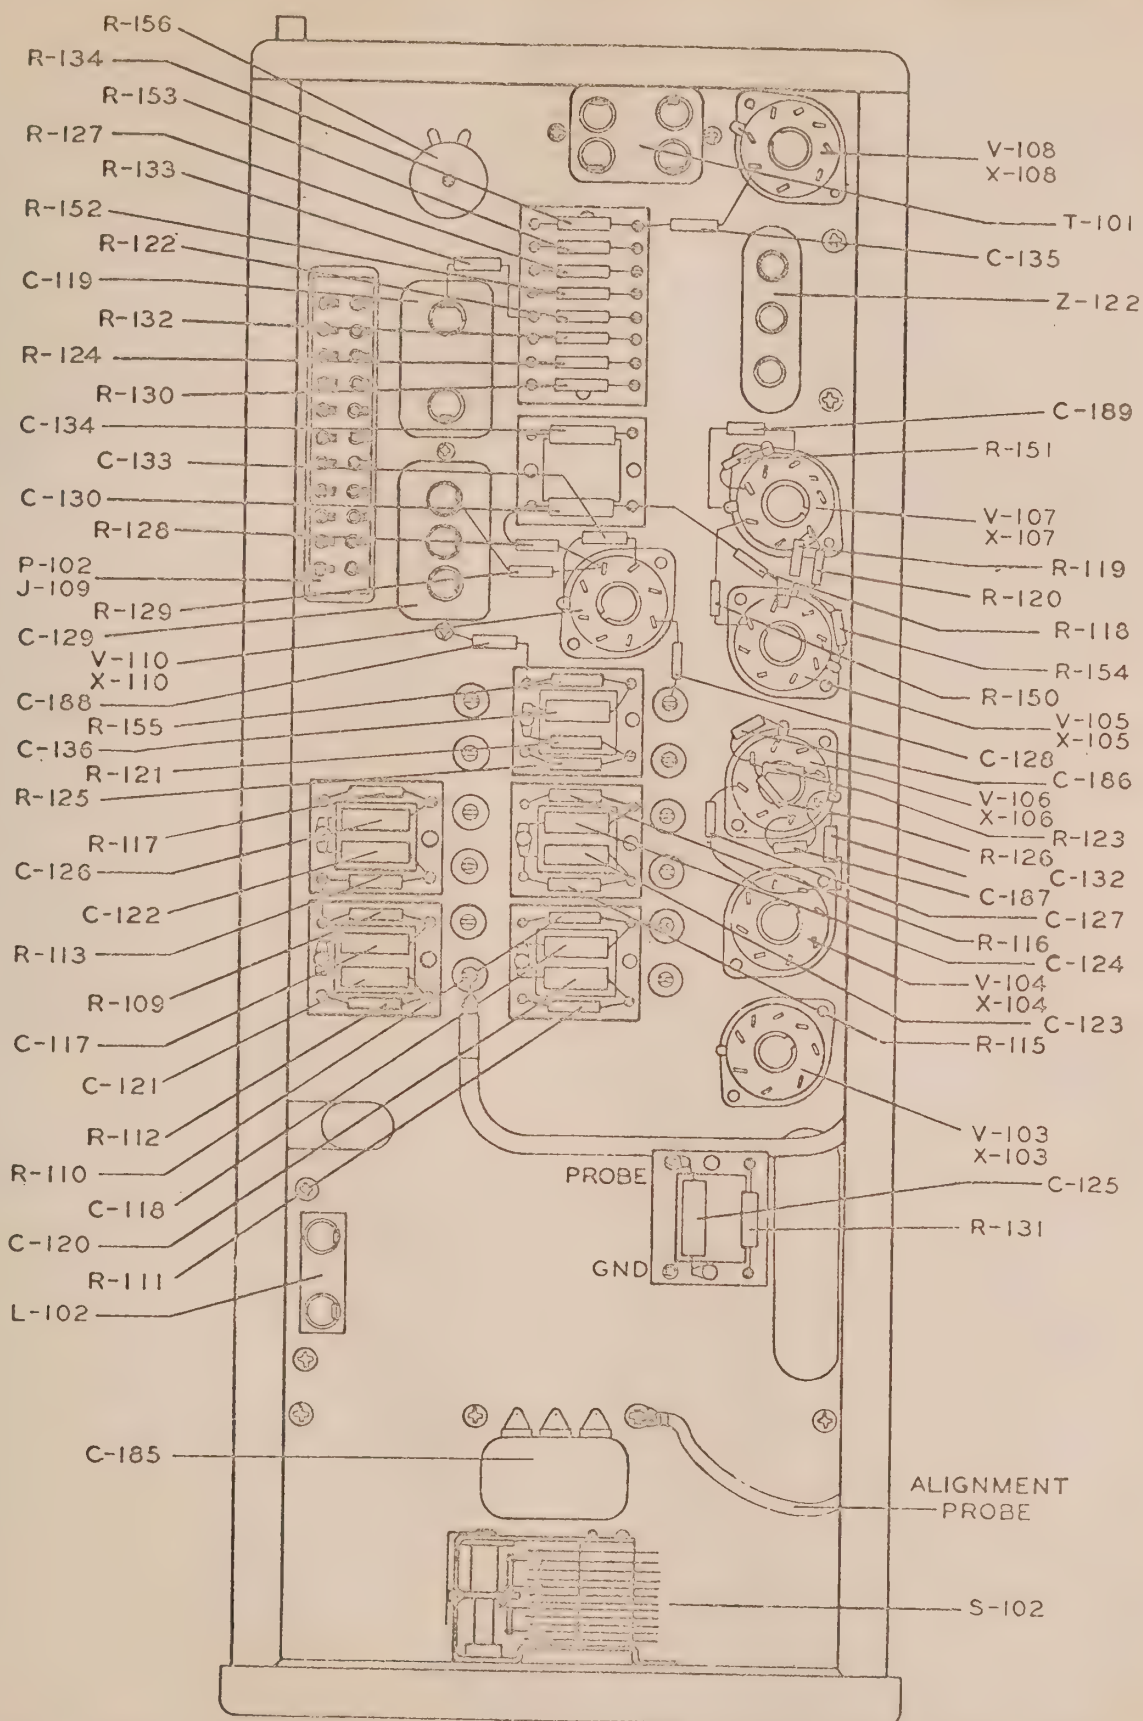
A. R-105A/ARR-15 Receiver Parts Arrangement—Left Side
